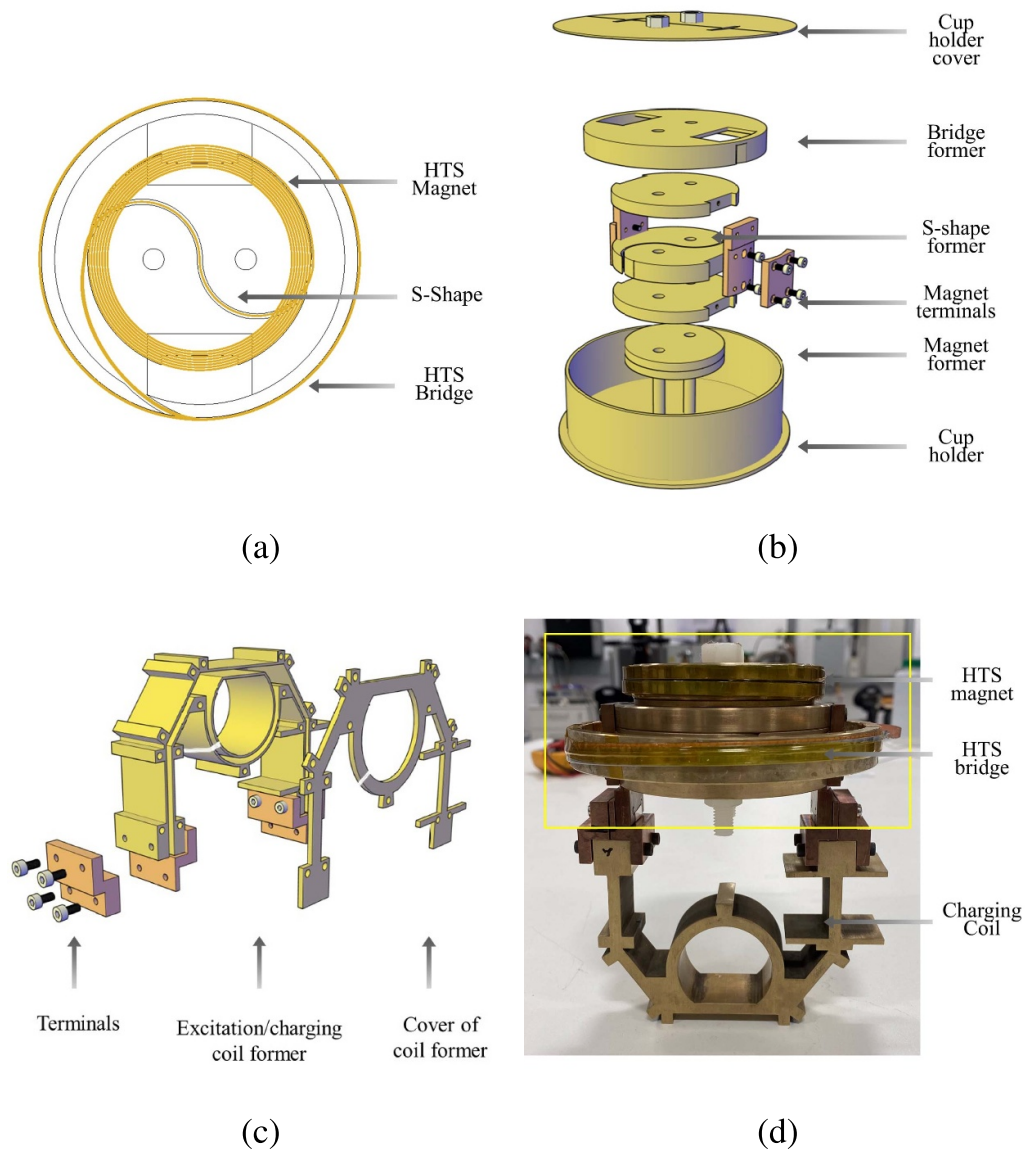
(a) The HTS magnet and bridge superconductor configured in a bifilar pancake configuration with direction change via an S-shaped slit in the former. (b) 3D exploded diagram of the HTS magnet former highlighting its components and design configuration. (c) Exploded diagram of charging coil former: showcasing components and terminals with adjoining bolts. (d) The yellow box depicts the HTS magnet, while the bottom section shows the charging coil.
